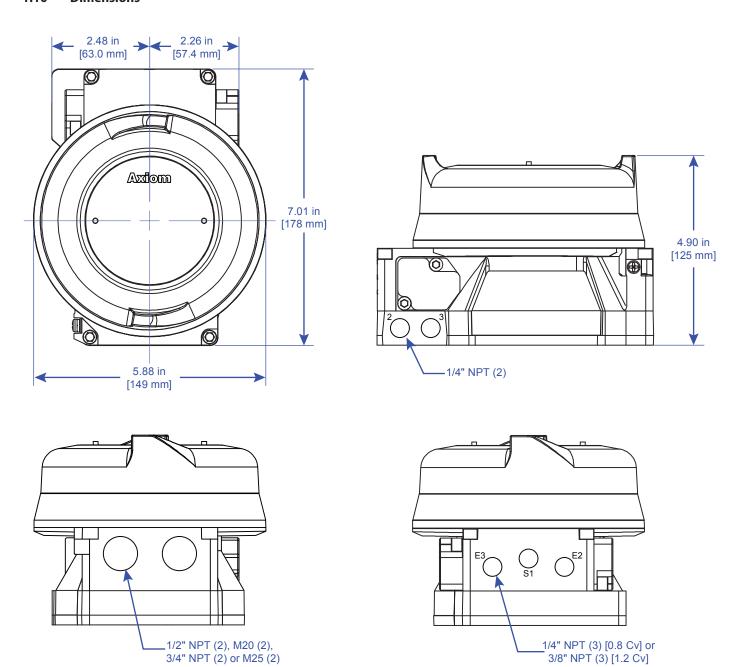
Axiom dual coil shuttle piston pneumatic valve
